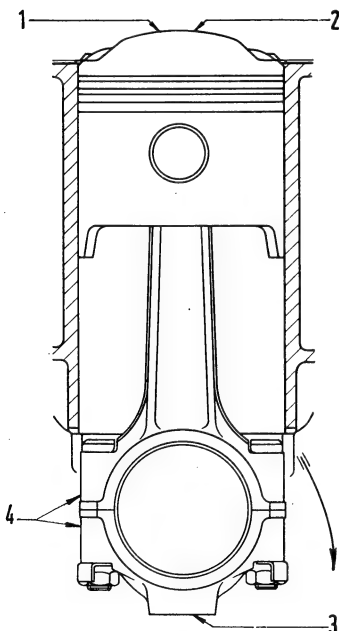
Installation diagram of 118 B.000 engine connecting rod-piston-pin assembly.
